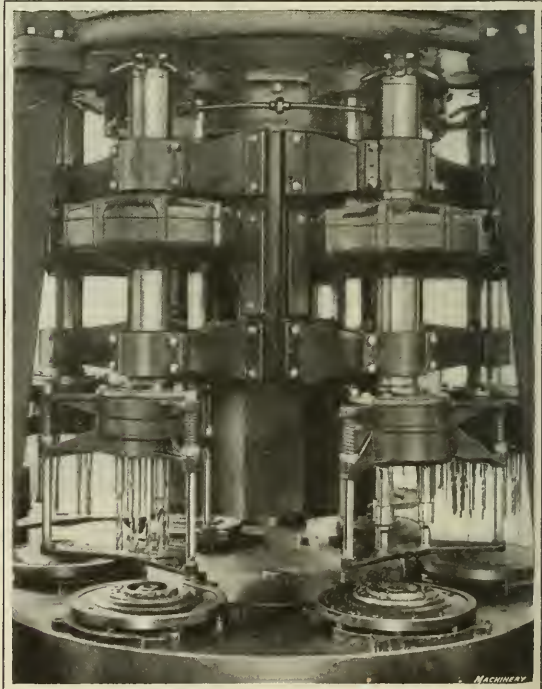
Arrangement of Large Drills and End-mills for machining Flywheels
